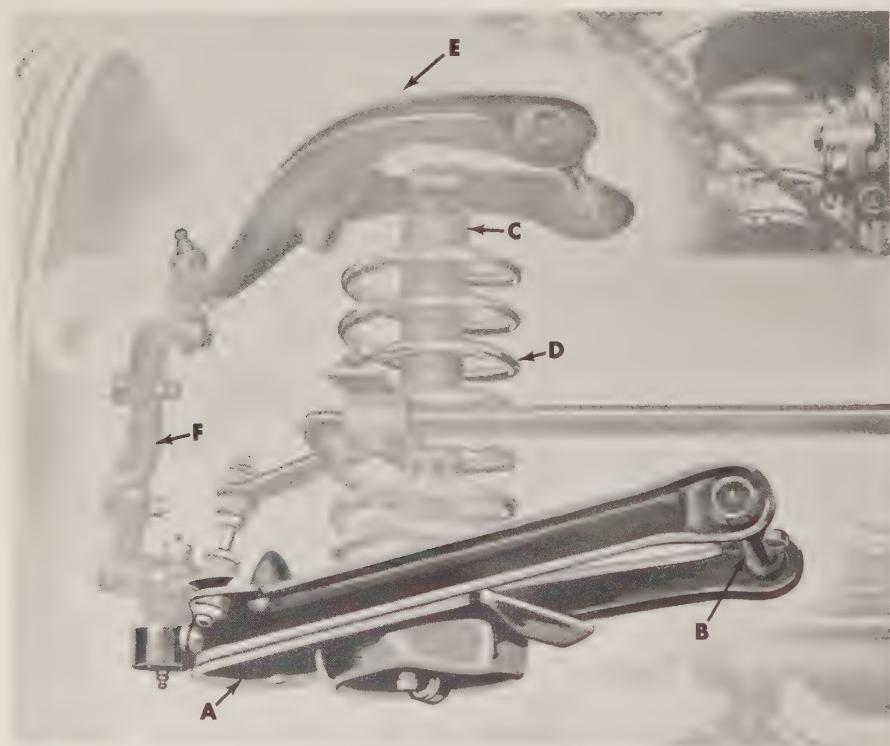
The cross shaft and bushing components of the 1957 Oldsmobile ball-joint front suspension are assembled into the lower control arm by means of a semi-automatic assembly machine designed especially for the operation. The front suspension is composed of the lower control arm (A), lower control arm cross shaft (B), shock absorber (C), coil spring (D), upper control arm (E), and the steering knuckle (F).
